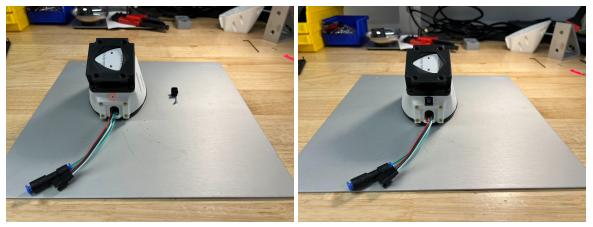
Location and fasteners necessary to attach the tube fitting clip to the *Bubble Gripper Body
